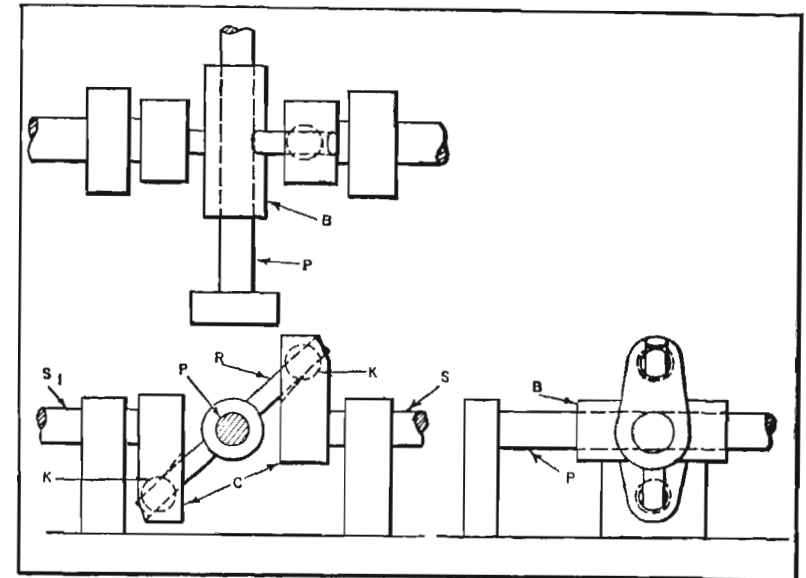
Diagram Showing Device for Rotating Shafts in Opposite Directions, the Shafts Being in Alignment
